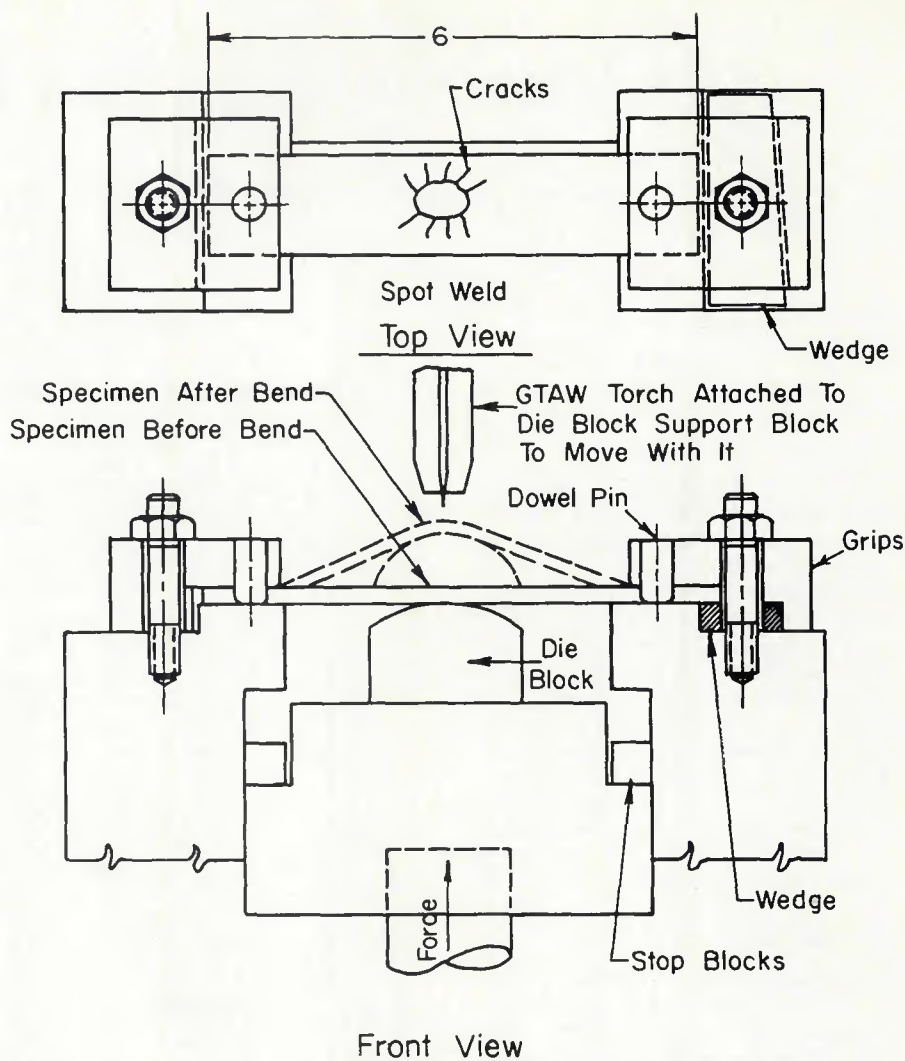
Schematic of the Spot V restraint test apparatus showing a weld specimen after bending
